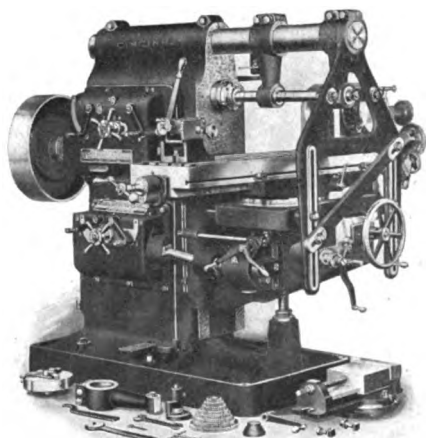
Nos. 2 and 3 Universal High Power Millers
